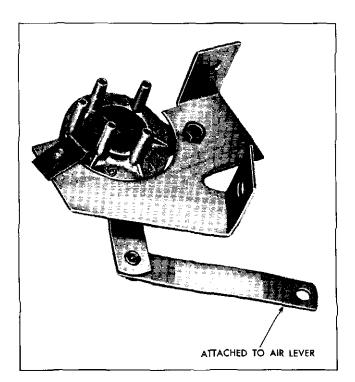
Vacuum Switch on Direct-Aire Heater Control Panel
